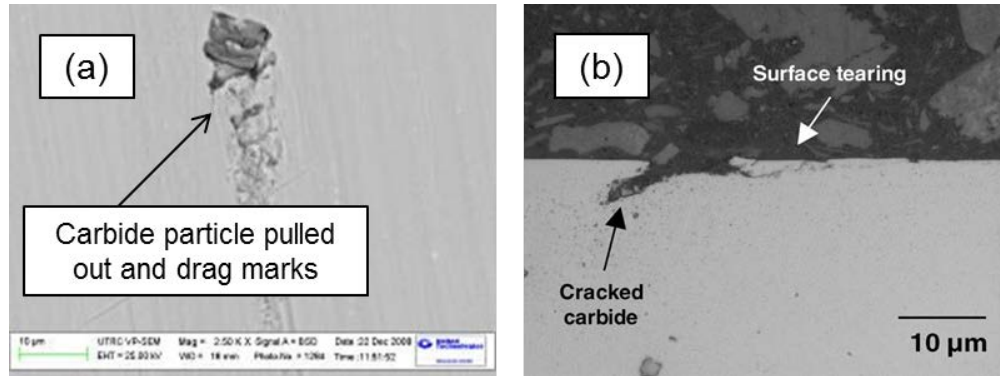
Surface damage due to worn tool in turning IN718. (a) Dragged carbide particle on the surface of workpiece [37] (b) Tearing and cracking of the surface [34]
